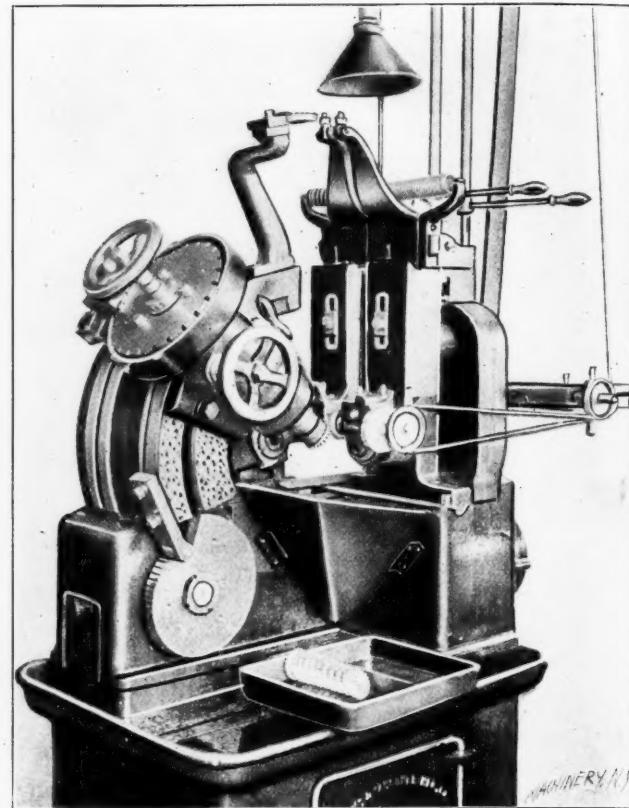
Bevel-gear Milling Machine of the Templet Type
